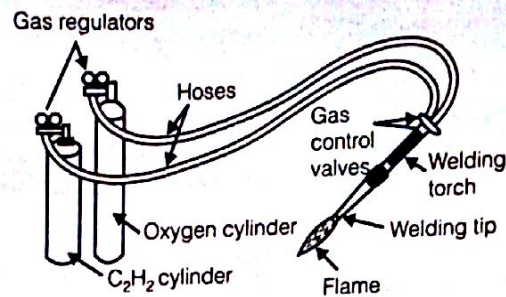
(a) Basic equipment used in oxyfuel gas welding.
